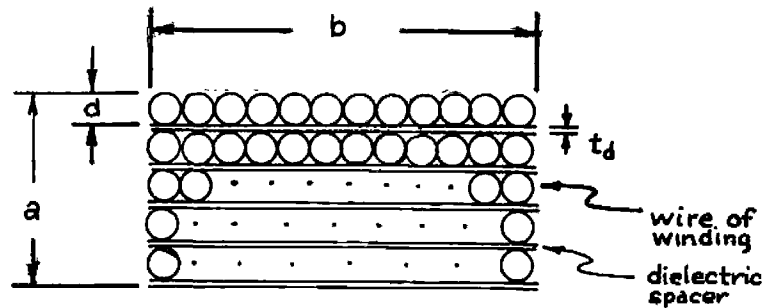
Cross-section of a winding showing dimensioning.
